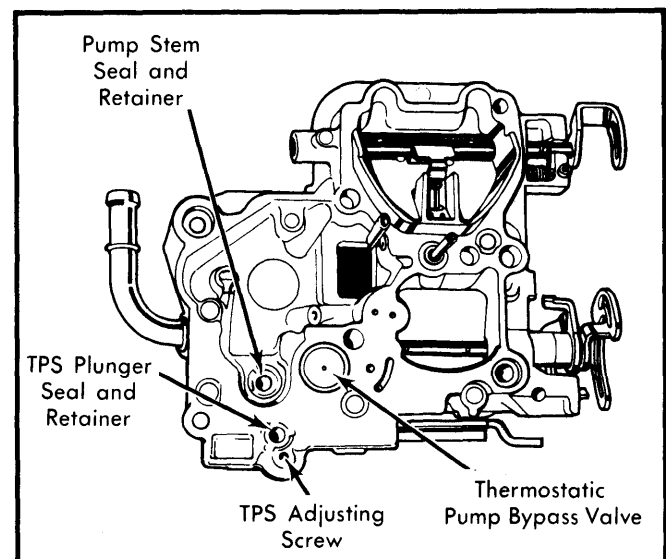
TPS Adjustment Screw Location for 1.8L & 2.0L Engine
